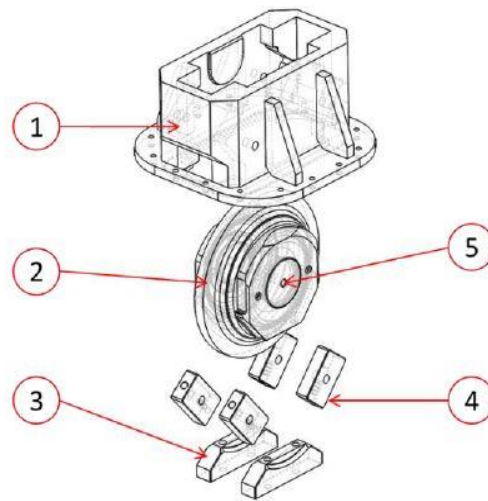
Double-Wedge system 1) Disc Housing, 2) Cutting ring with roller base, 3) Fixing wedge, 4) Parallel piece, 5) Axle flange
